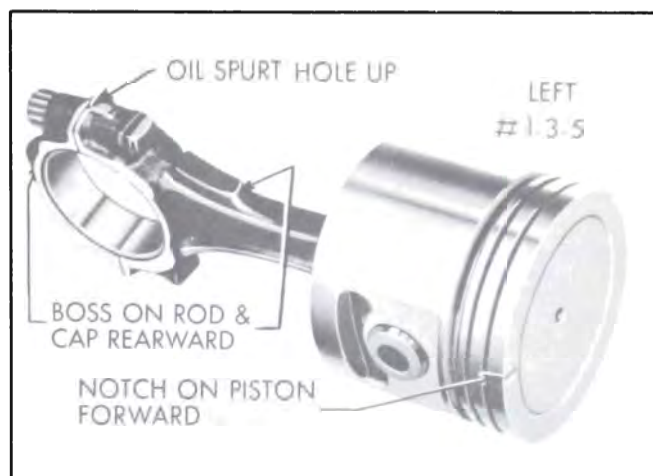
V-6 Left Bank Piston and Rod Assembly
